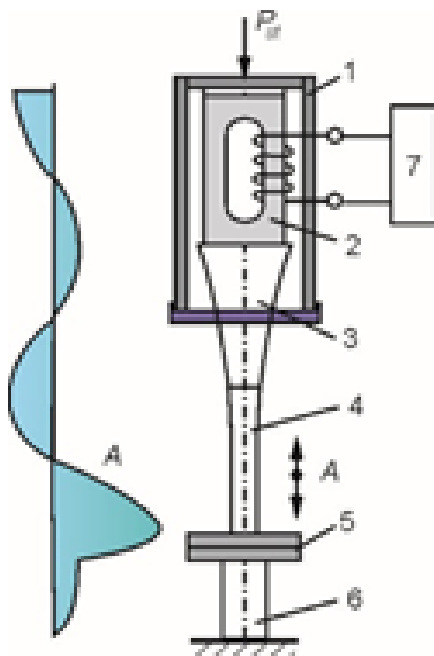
Welding machine with the magnetostriction transducer (1 – transducer housing, 2 – magnetostriction transducer with the winding, 3 – transformer of elastic vibration, 4 – waveguide, 5 – welded elements, 6 – anvil, 7 – electronic generator, A – amplitude of vibration) [6]
